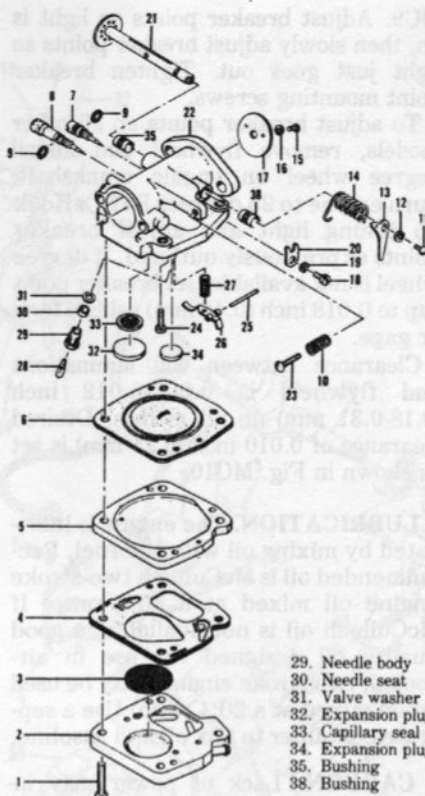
Exploded view of McCulloch carburetor used on MC-7, MC-8, MC-20, MC-30, MC-40 and MC-70 models. Carburetors used on Models MC-2, MC-45 and MC-75 are similar.
